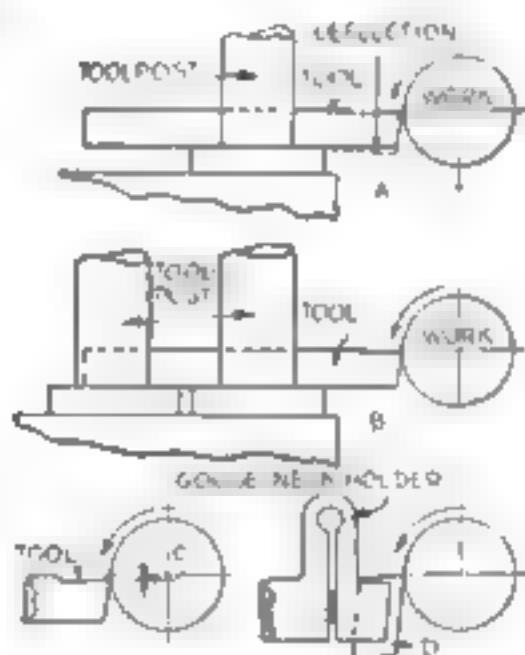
Diagram that illustrates how chatter is caused and may be prevented in turning
